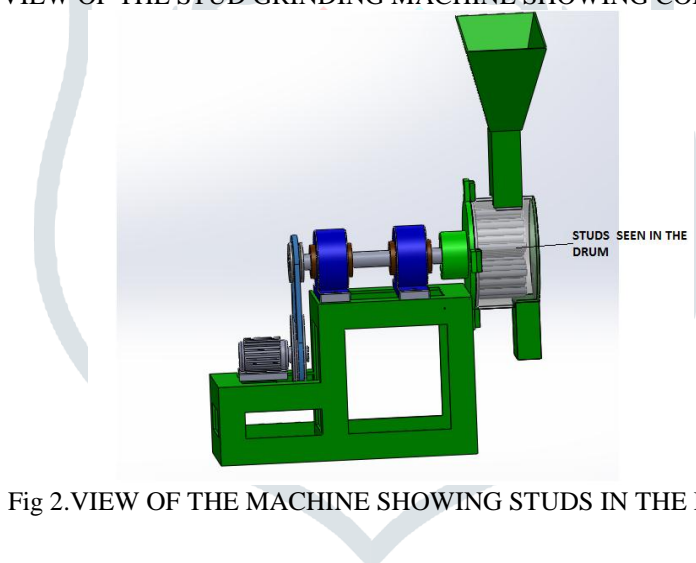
VIEW OF THE MACHINE SHOWING STUDS IN THE DRUM
